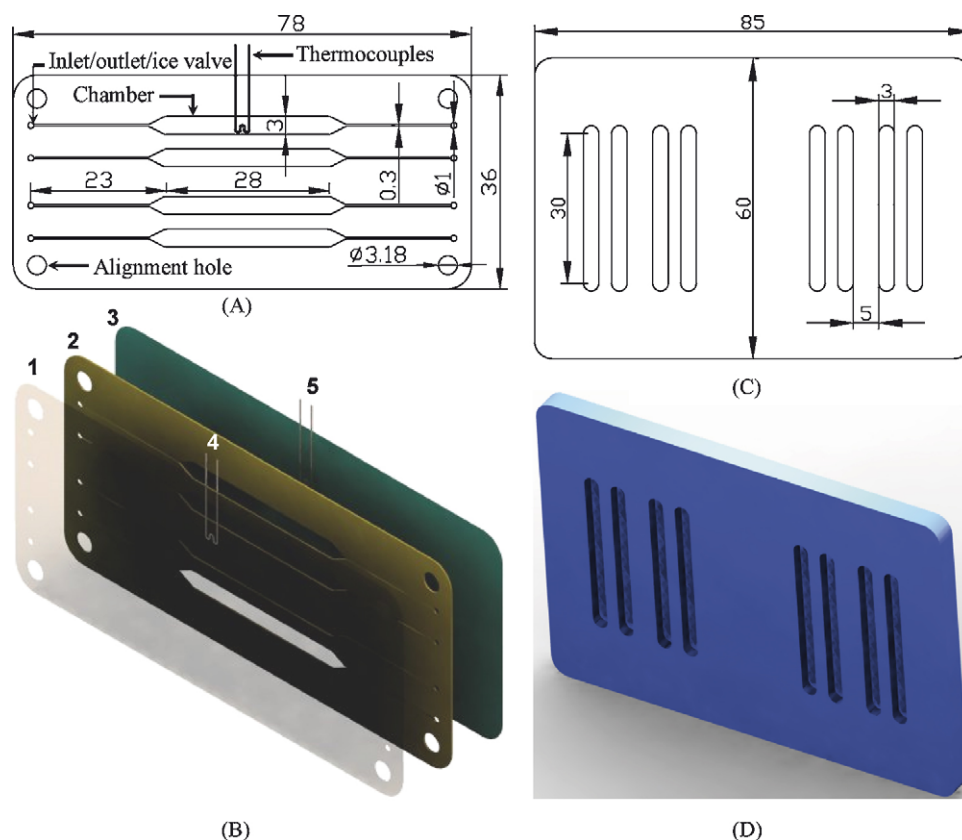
Design of PCR card and top plate. (A) Layout of PCR card with thermocouples. (B) Rendering of PCR card assembly: (1) PP film; (2) structured PC sheet; (3) Al foil; (4) thermocouple, top; (5) thermocouple, bottom. (C) Layout of top plate. (D) Rendering of top plate.
